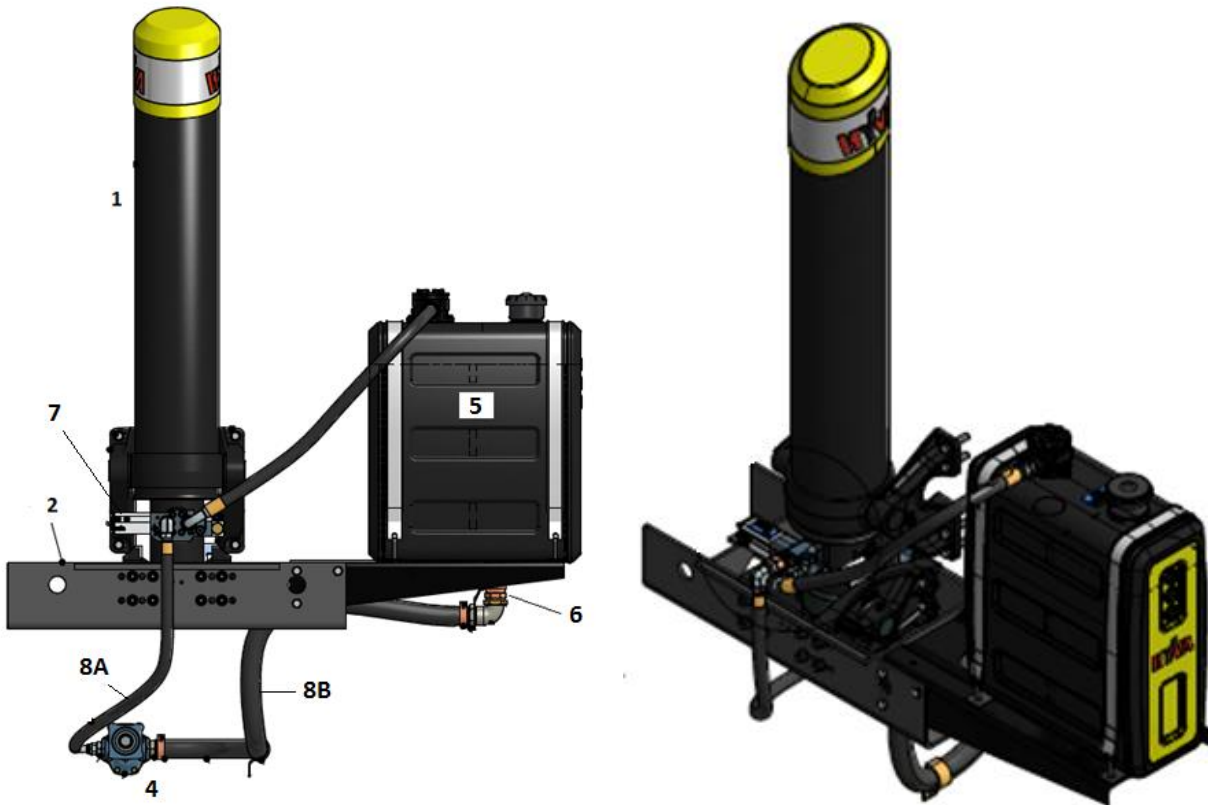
EXAMPLE OF A HYDRAULIC SYSTEM
